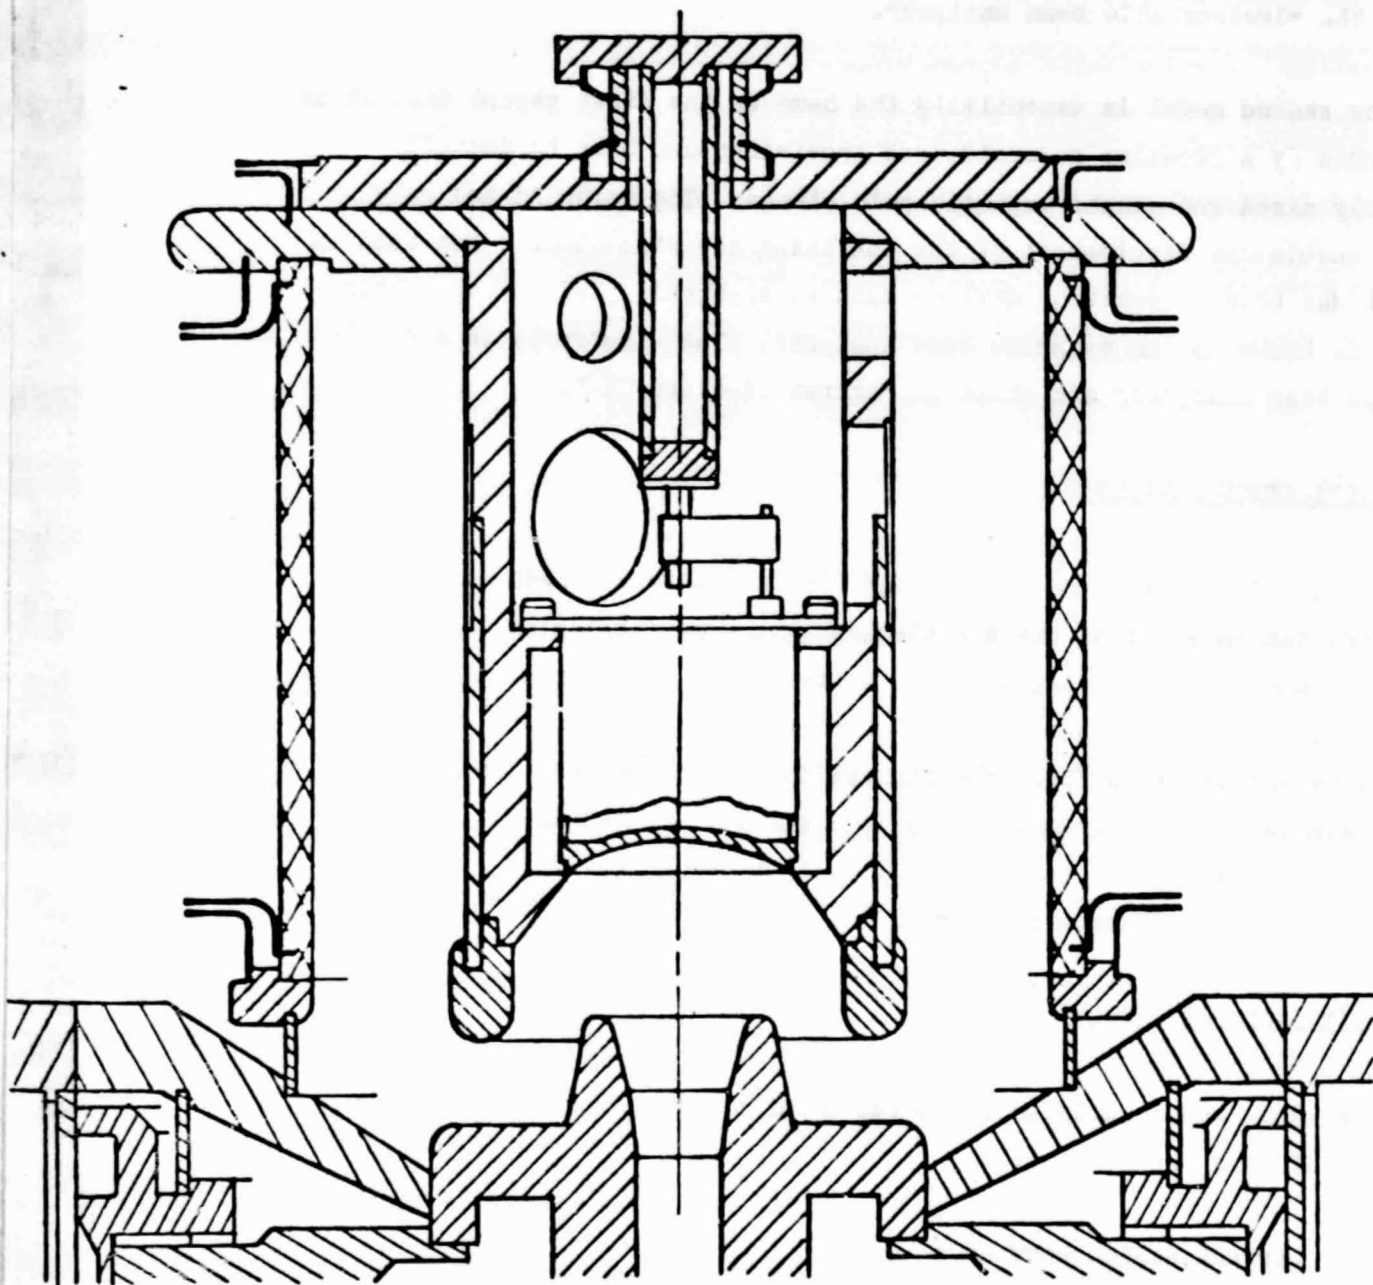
NEW DESIGN LAYOUT VKS-8274 JPL
